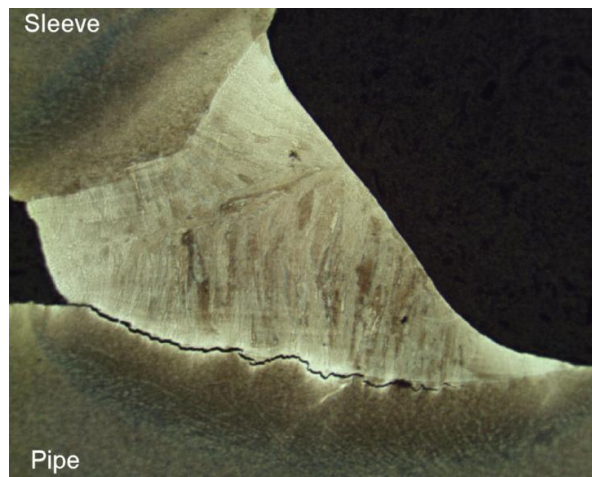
Hydrogen assisted crack in a sleeve repair fillet weld ⁴²
